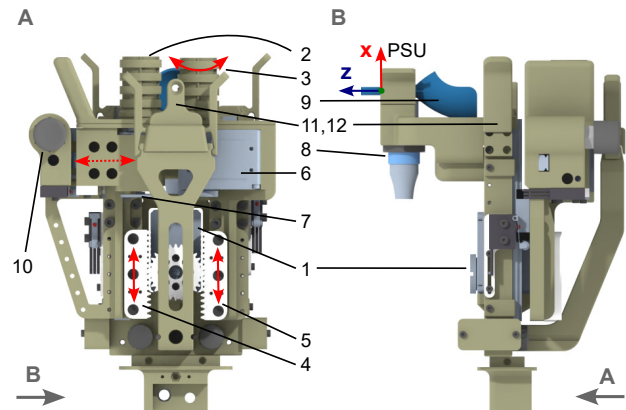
Frontal (A) and side view (B) of the PSU with the red arrows indicating the possible actuated (solid arrow) and manual motions (dotted arrow) of the components: the servomotor for the shaft rotation (1) drives the translation of the rollers (2, 3) via two gear racks (4, 5). The servomotor for the shaft translation (6) actuates the FU shaft translation into the patient. The spring-tensioned roller (2) ensures contact between FU shaft and driven roller (3) and is connected to an encoder (7) for slip detection. The inductive sensor (8) detects when the FU tip enters/leaves the ureteral access sheath (9). A locking indexing plunger (10) can fixate roller (2) in the detached position. Two guides (11, 12) ensure a defined position of the FU shaft.
